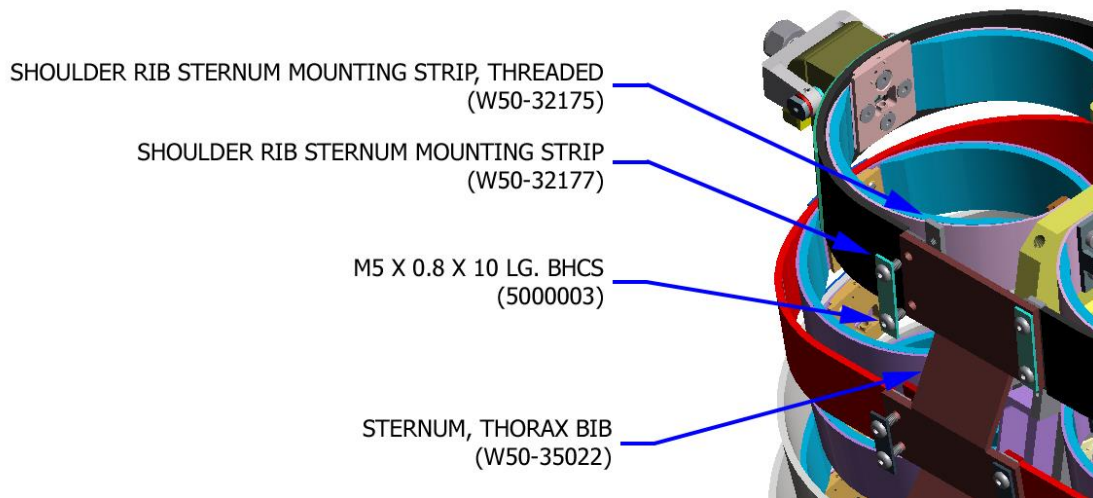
Detailed view of attaching shoulder mounting strips.
